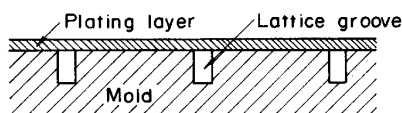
Copper plate of mold containing lattice grooves for casting test.
